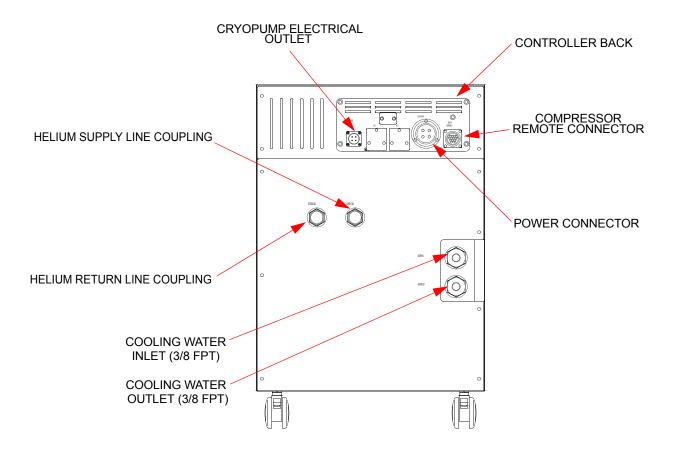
8600 Compressor Rear View Component Locations, Type 02
